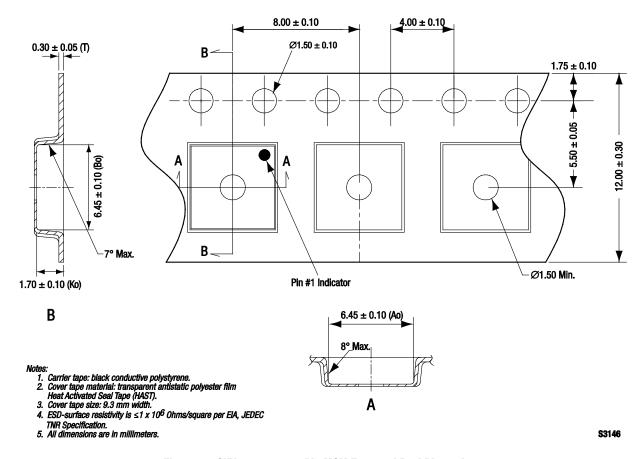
SKY65127-11 20-Pin MCM Tape and Reel Dimensions
